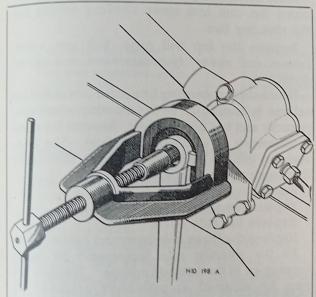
A typical extractor in use. The steering arm may be withdrawn without disturbing the box mounting.
